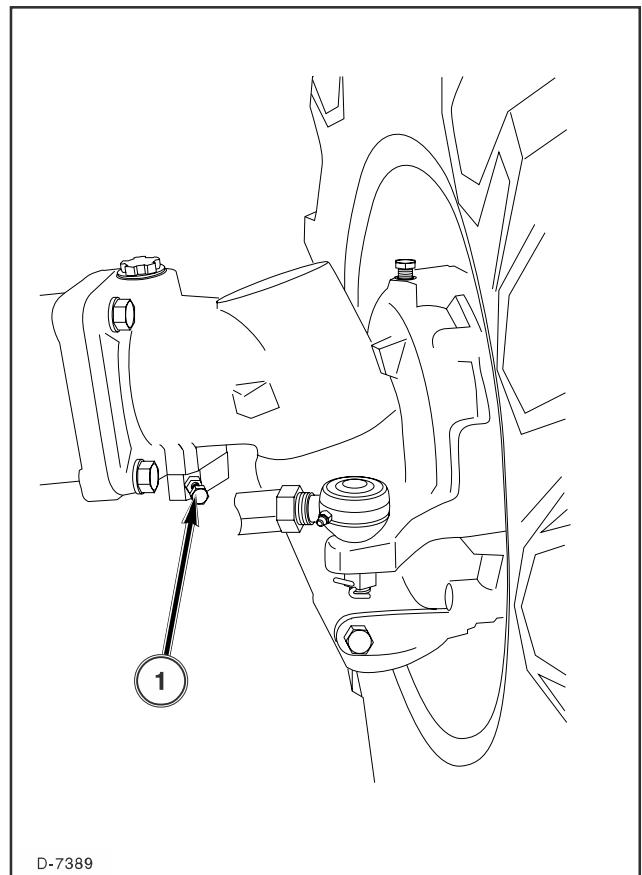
A-33: Whenever front tread is changed, front wheels must be checked for turning clearance. ON some narrow settings, front tires/wheels may contact tractor chassis.
